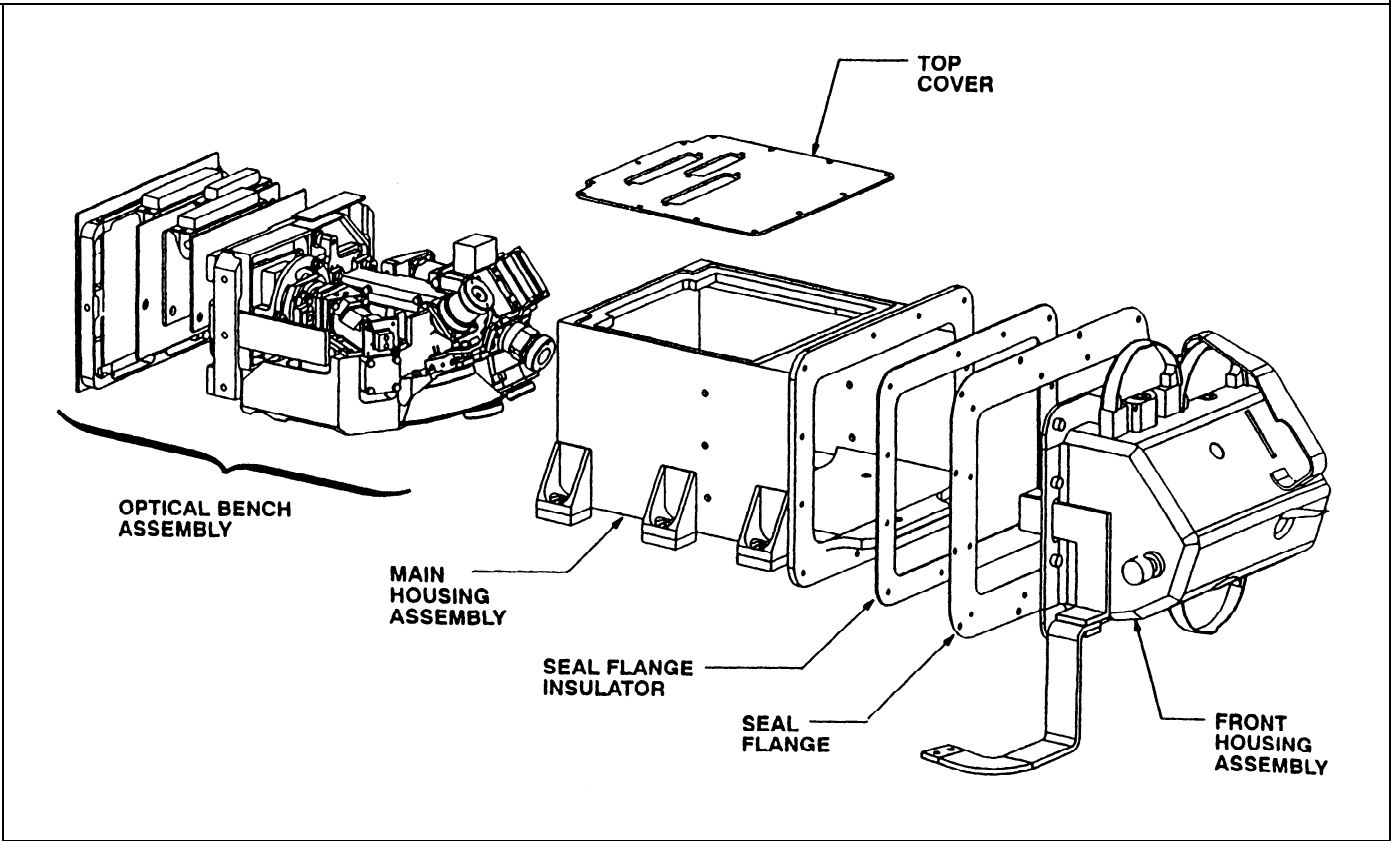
The optical bench assembly and how it fits into the Sensor Head package.
